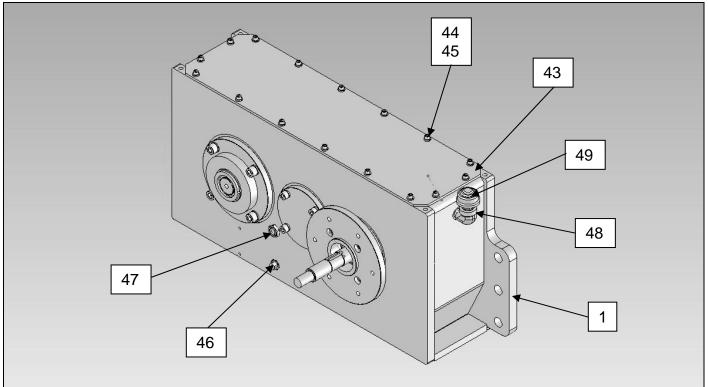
, Gearbox Assembly, (Lid, Breather, Sight Gauge and Plug)
